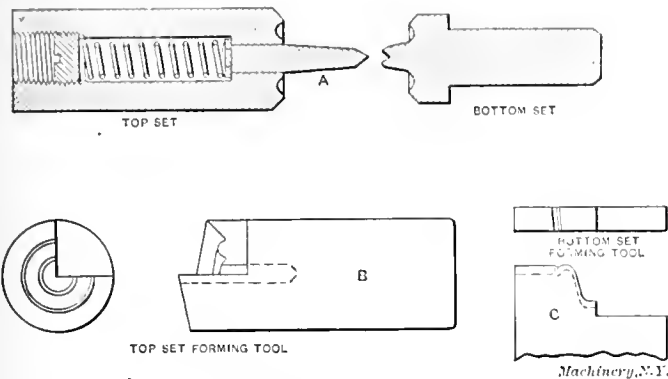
Tools or Sets for Round Eyelets, and Forming Tools by which they are Formed.
